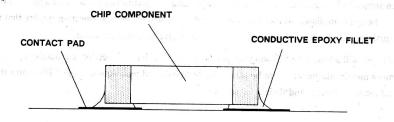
Chip components are similarly attached with epoxy as with solder but footprint pad dimensions can be tighter.
